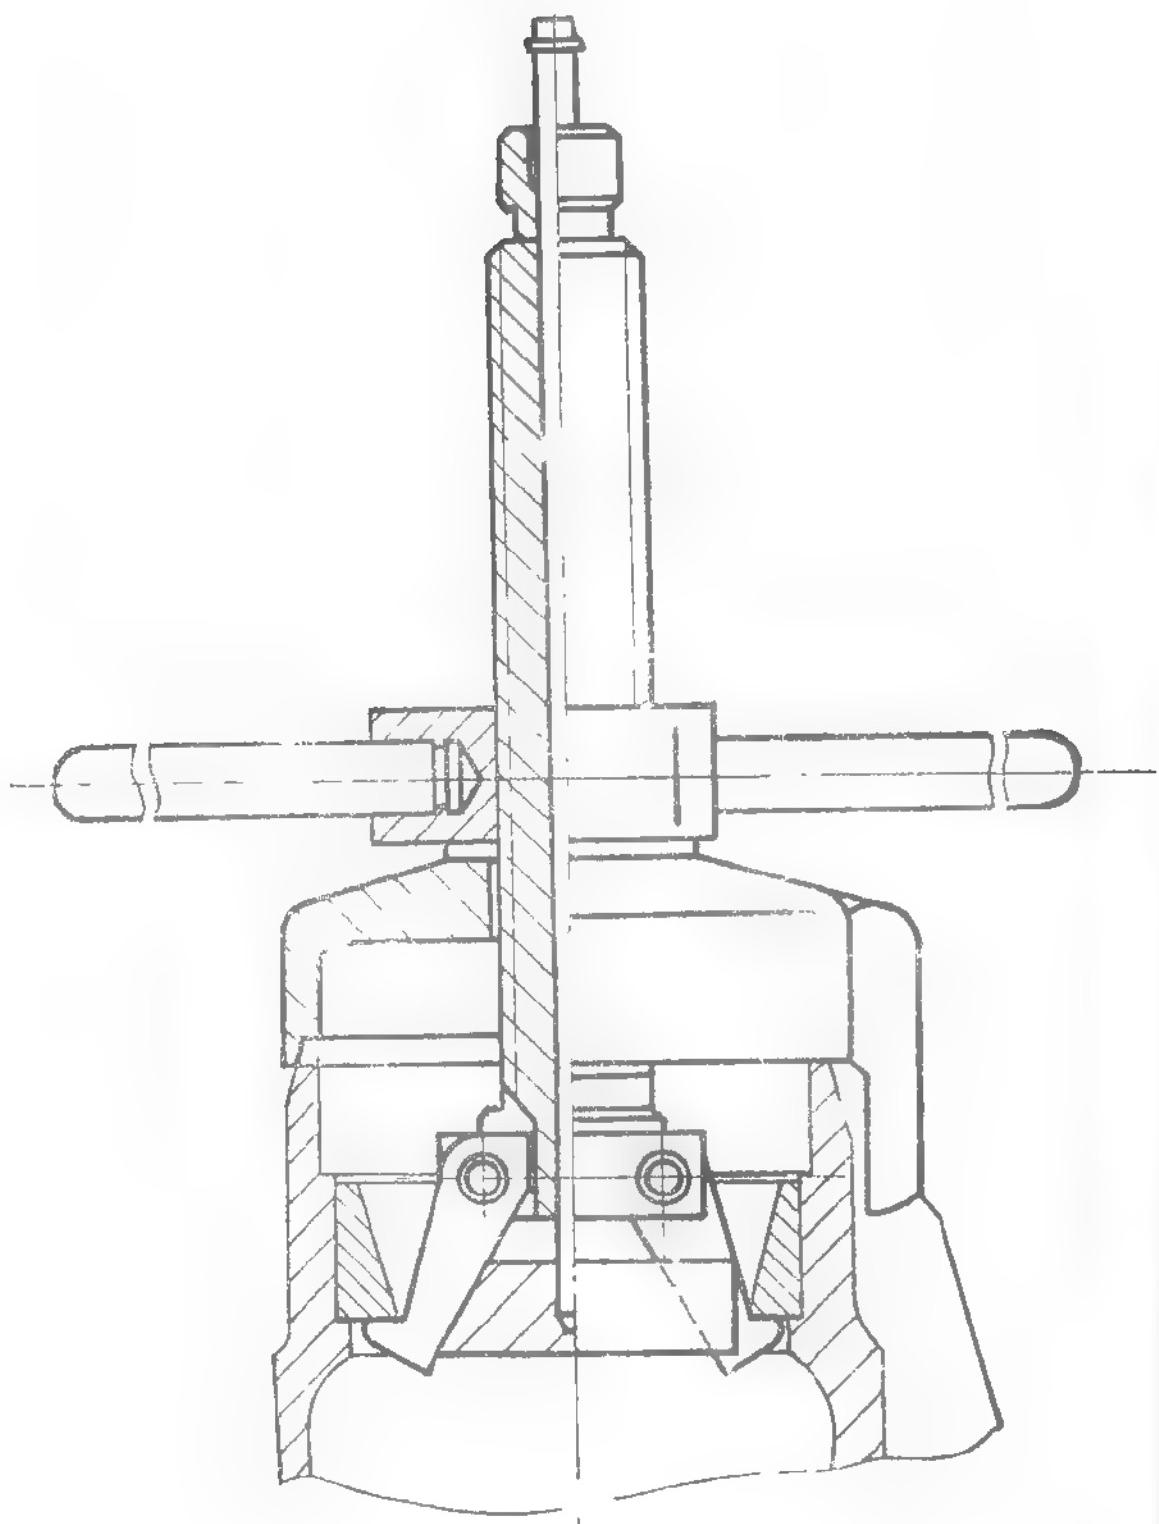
EXTRACTING DRIVE PINION REAR BEARING OUTER RACE
